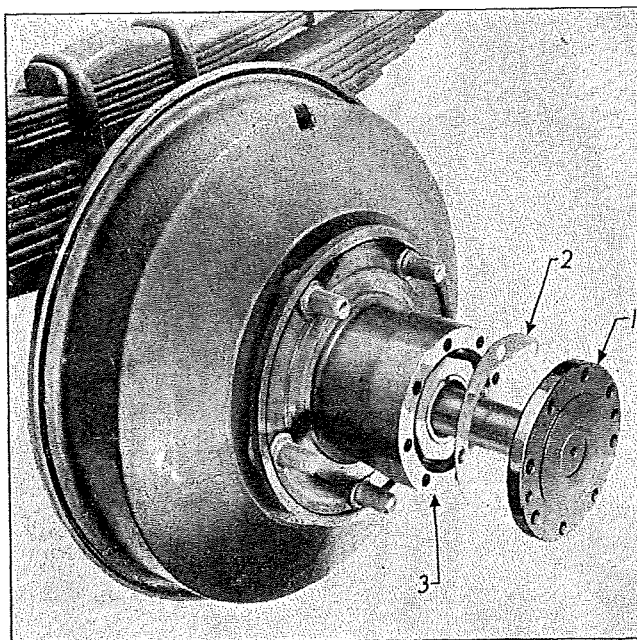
Group 124 Removing Axle Shaft from Dodge Truck
